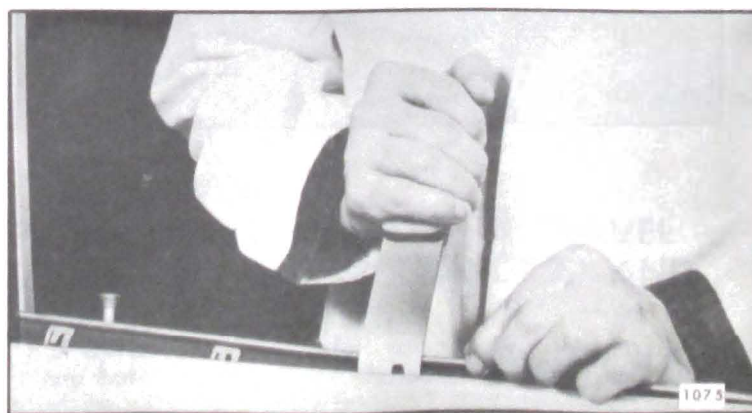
Glass Run Channel Inner - Outer Strip Assembly Removal - "A-X & Z" Styles
